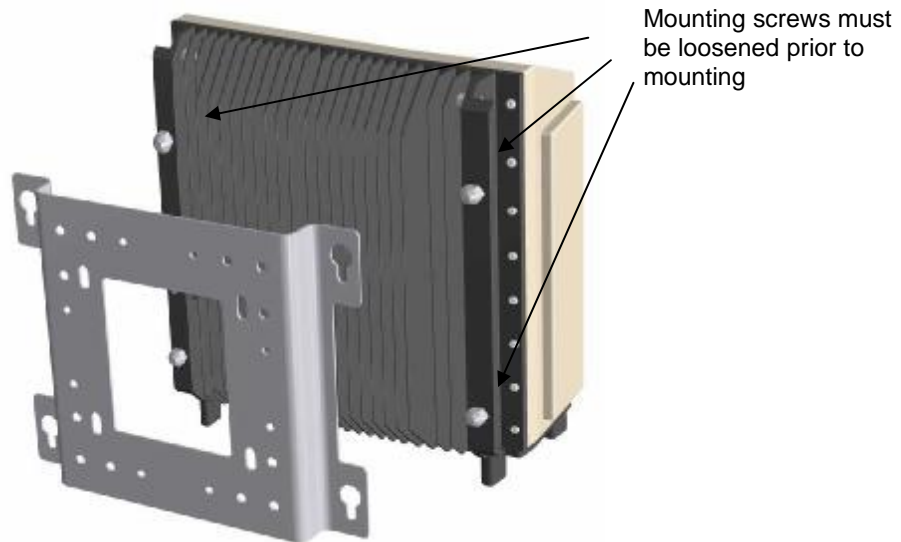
Un-tighten the four mounting screws on the back of the TMB before you hook it onto the mounting plate.
